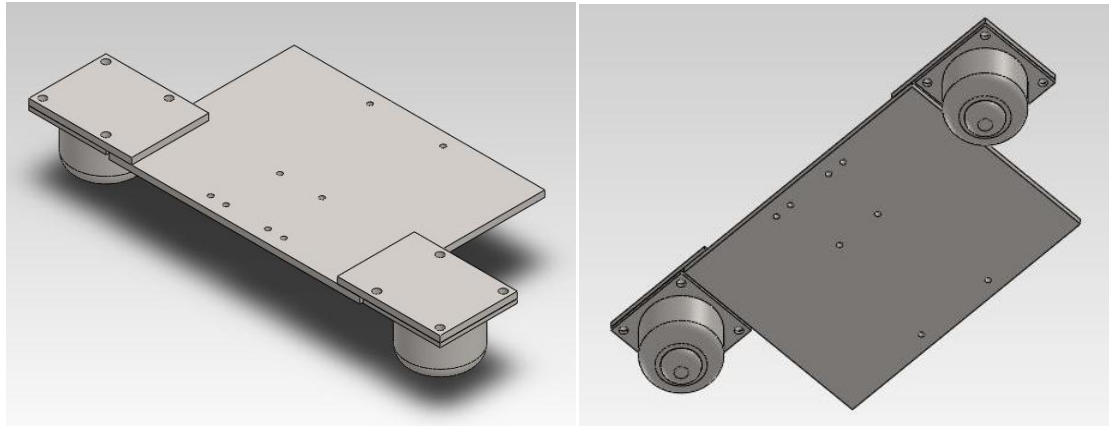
Top view and bottom view of the slider board plate. The board plate is bolted onto the boards via the board's truck and binding holes. The ball transfers act as a way for Method board to slide back and forth.
